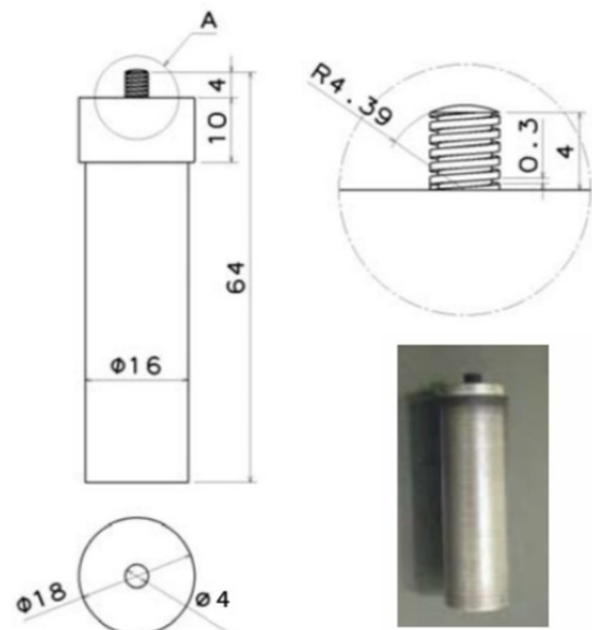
Picture of the FSP tool with its dimensions (in mm).
